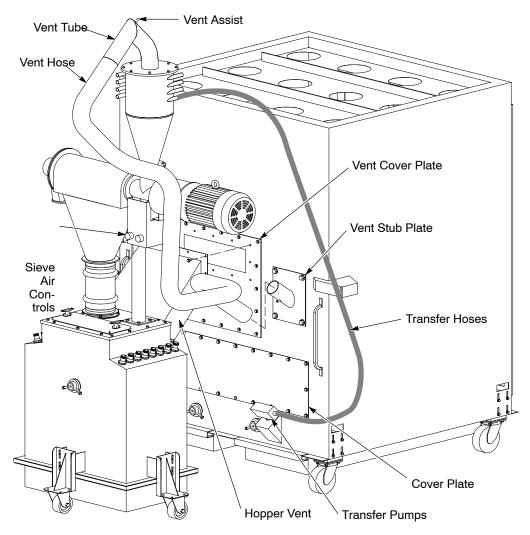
HTM-16 Feed Hopper Connections to Color Module
